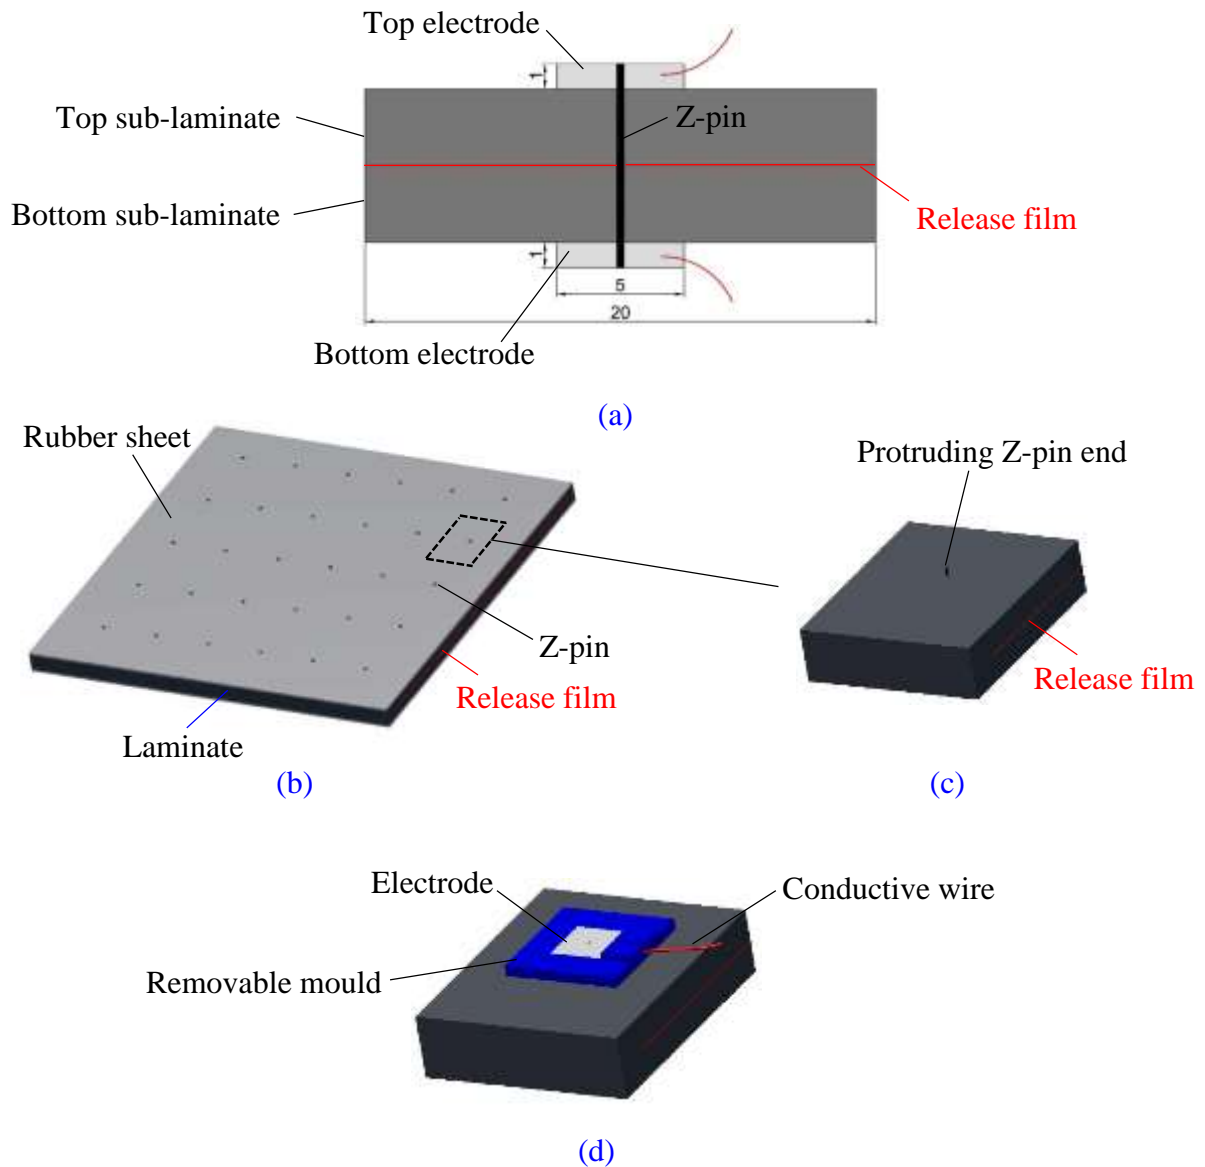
(a) Configuration of single sensing Z-pin coupon for bridging test; (b) un-cured laminate plate with inserted pins and attached rubber sheets; (c) initial coupon with bare Z-pin ends; (d) electrode arrangement with the aid of removable moulds.
